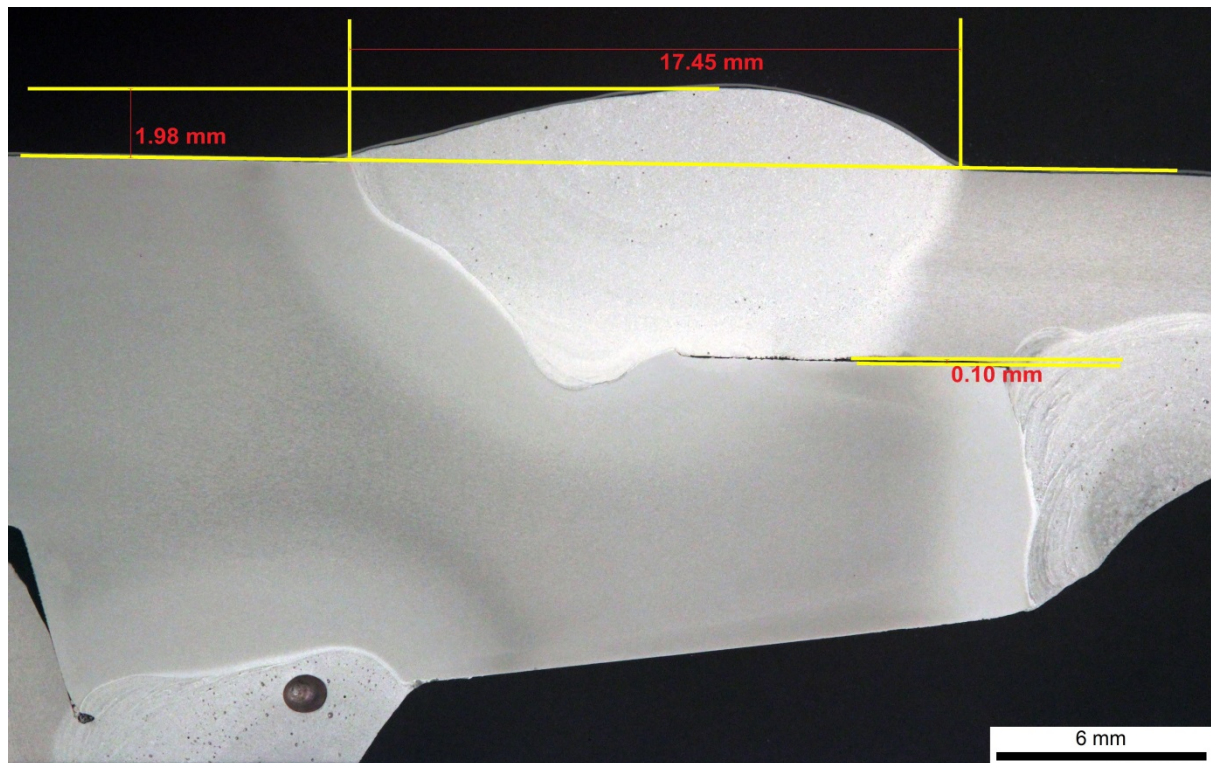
J3564 sample W03-04, slice 3, right side of Figure I36. No defect of note present in the joint. Large gas pore in the fillet weld joining the bulkhead to the extrusion band.
